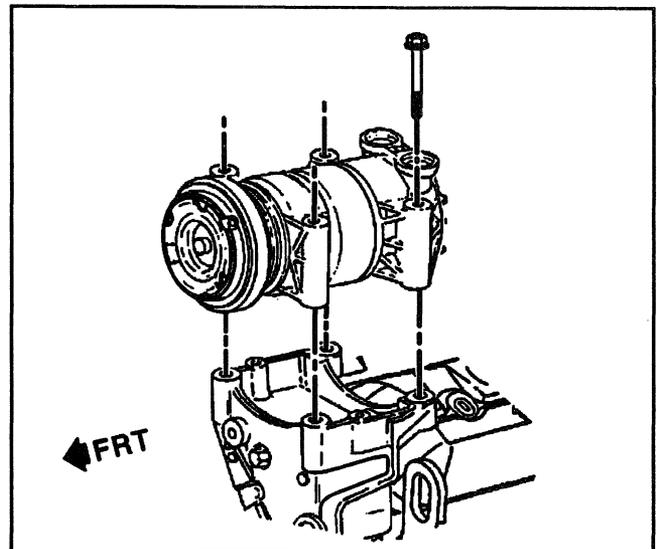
Compressor Mounting (4.3L, 5.0L, and 5.7L Engines)
